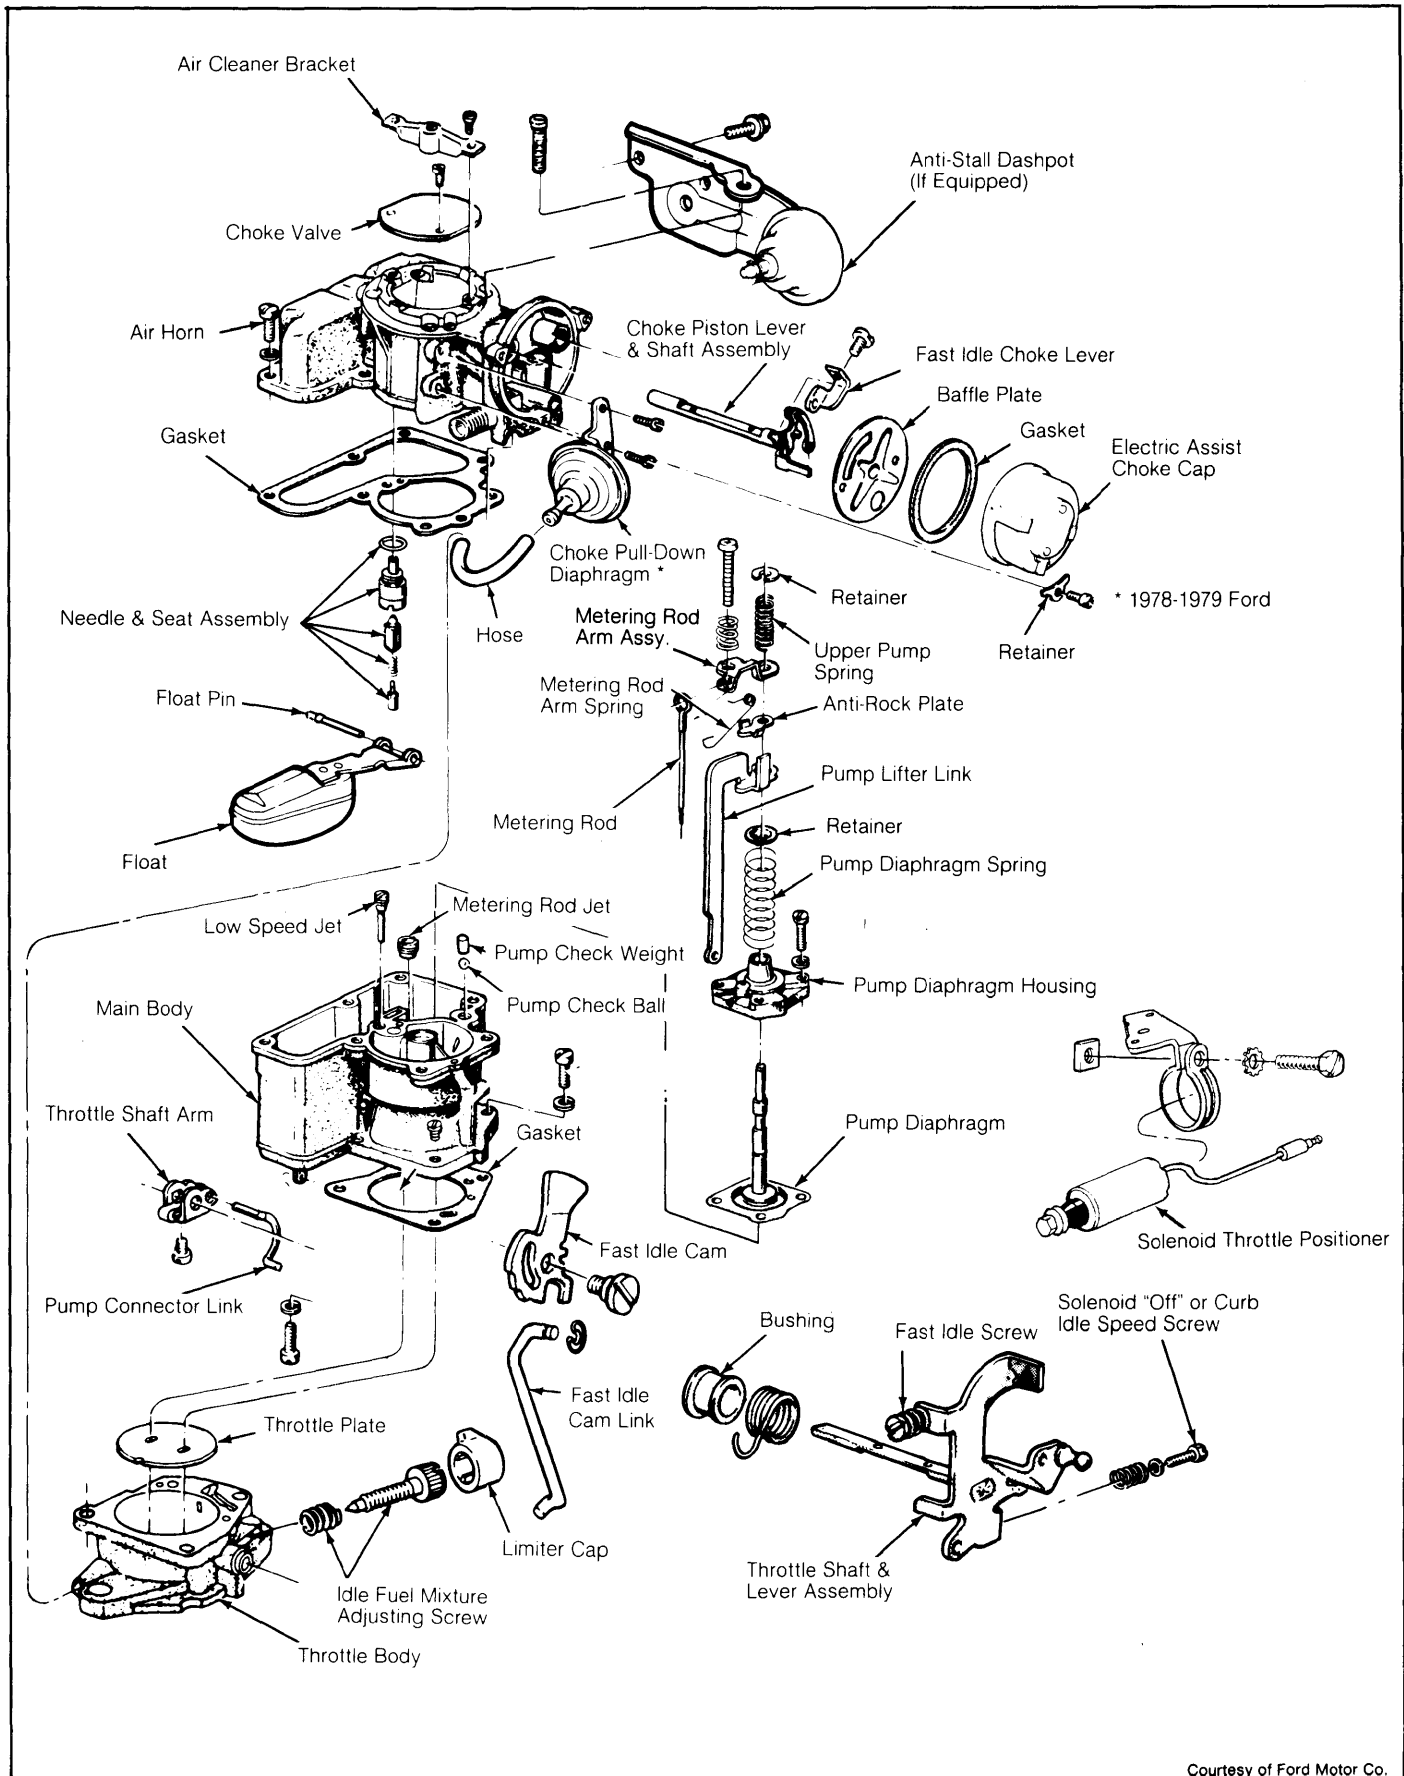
Exploded View of Carter Model YFA & YFA 1-Barrel Carburetor
